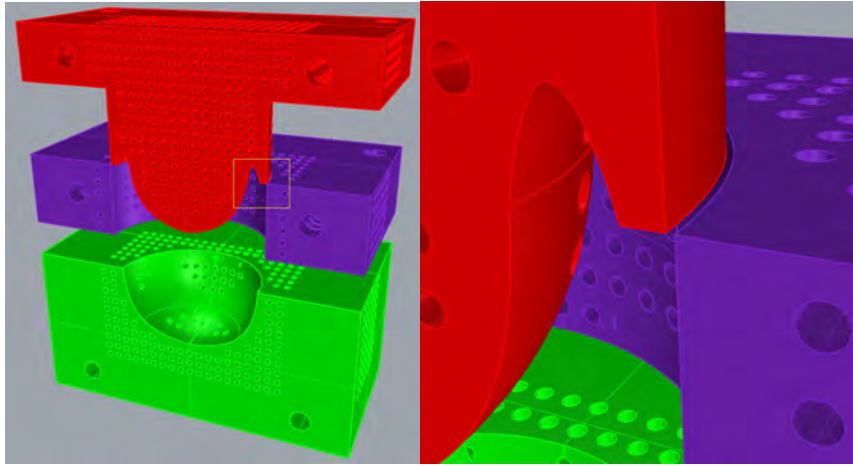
Cross-sectional view of the complete mould, showing how three parts of the mould fit together (left). Zoomed view of the yellow box on the left image shows the gap between the top mould and the middle mould, which measures to 0.3mm (right).
